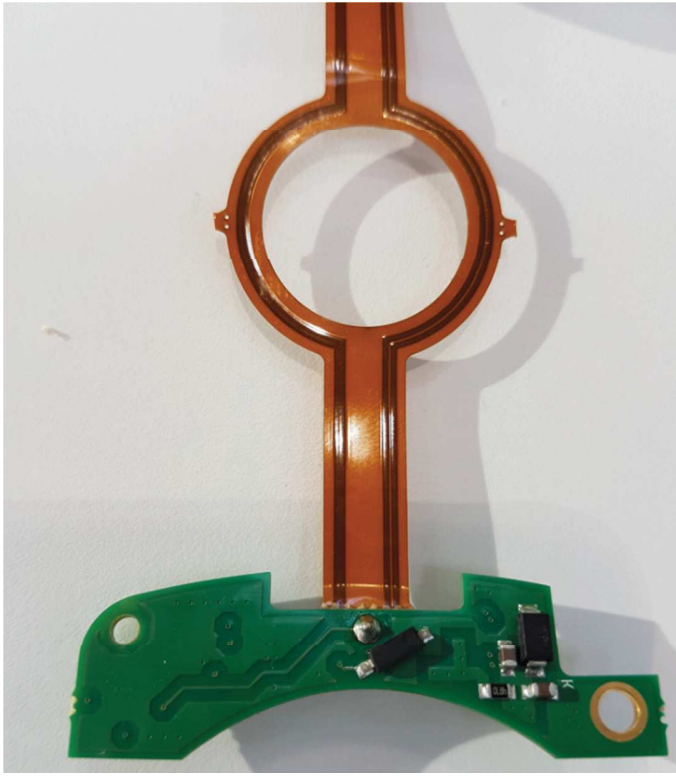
Close up view of Radio Module and flexible PCB with Plastic housing
